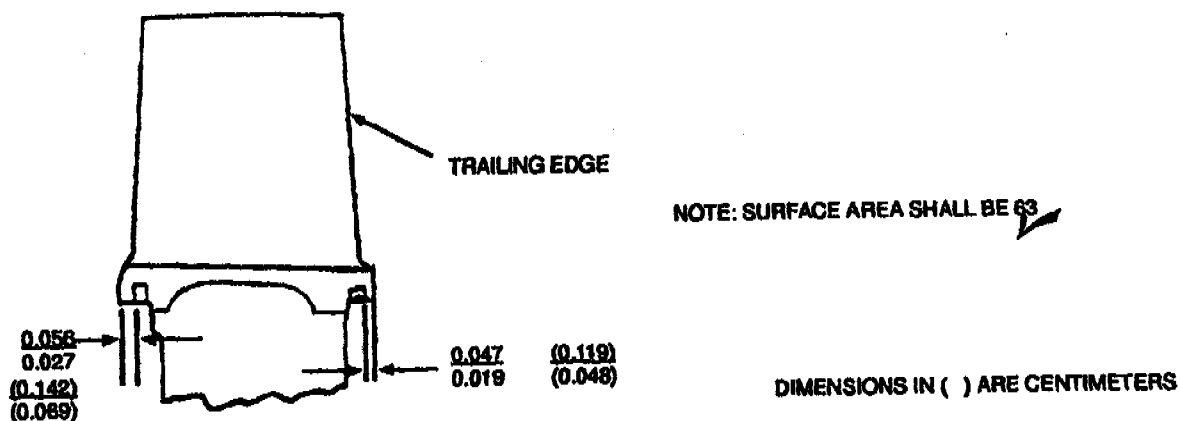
First Stage Producer Turbine Rotor Assembly Blade Trailing Edge Shroud Thickness Limits.
